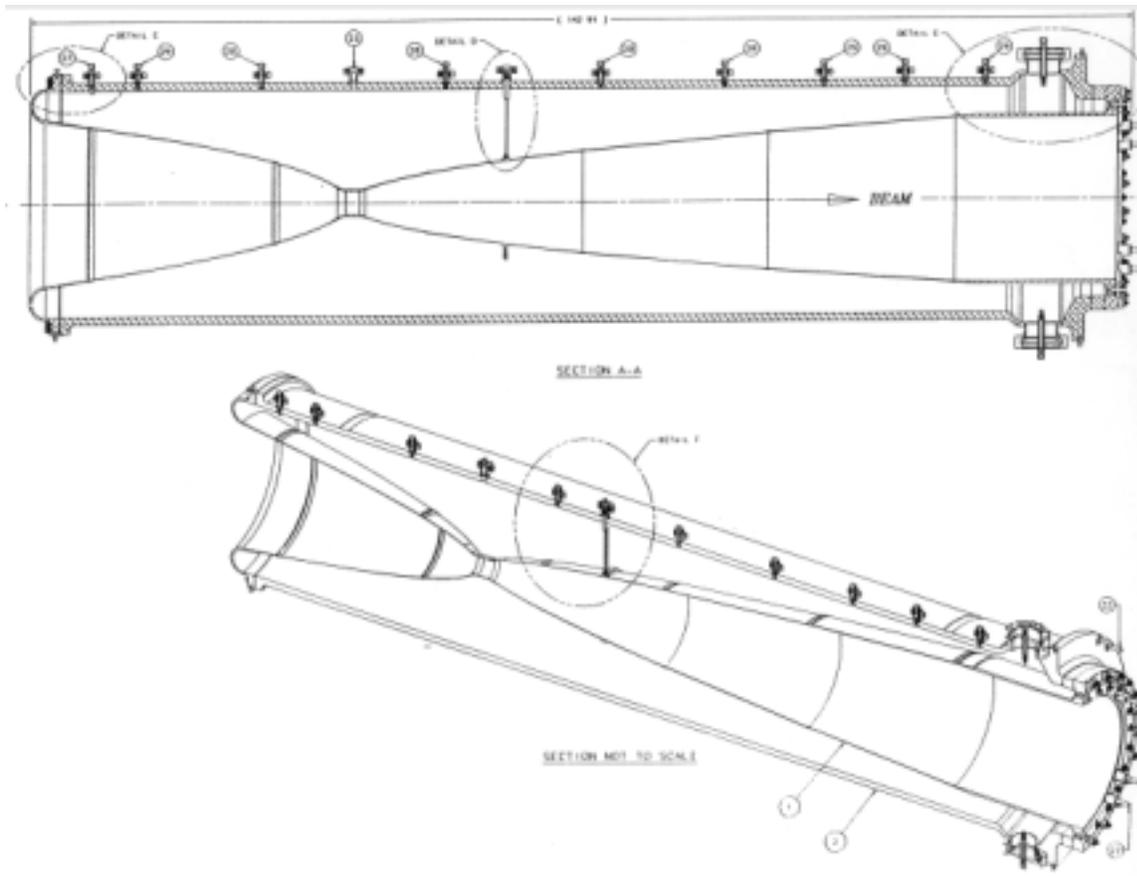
Horn 2 assembly drawing. (From drawing 8875.112-ME-363382).
